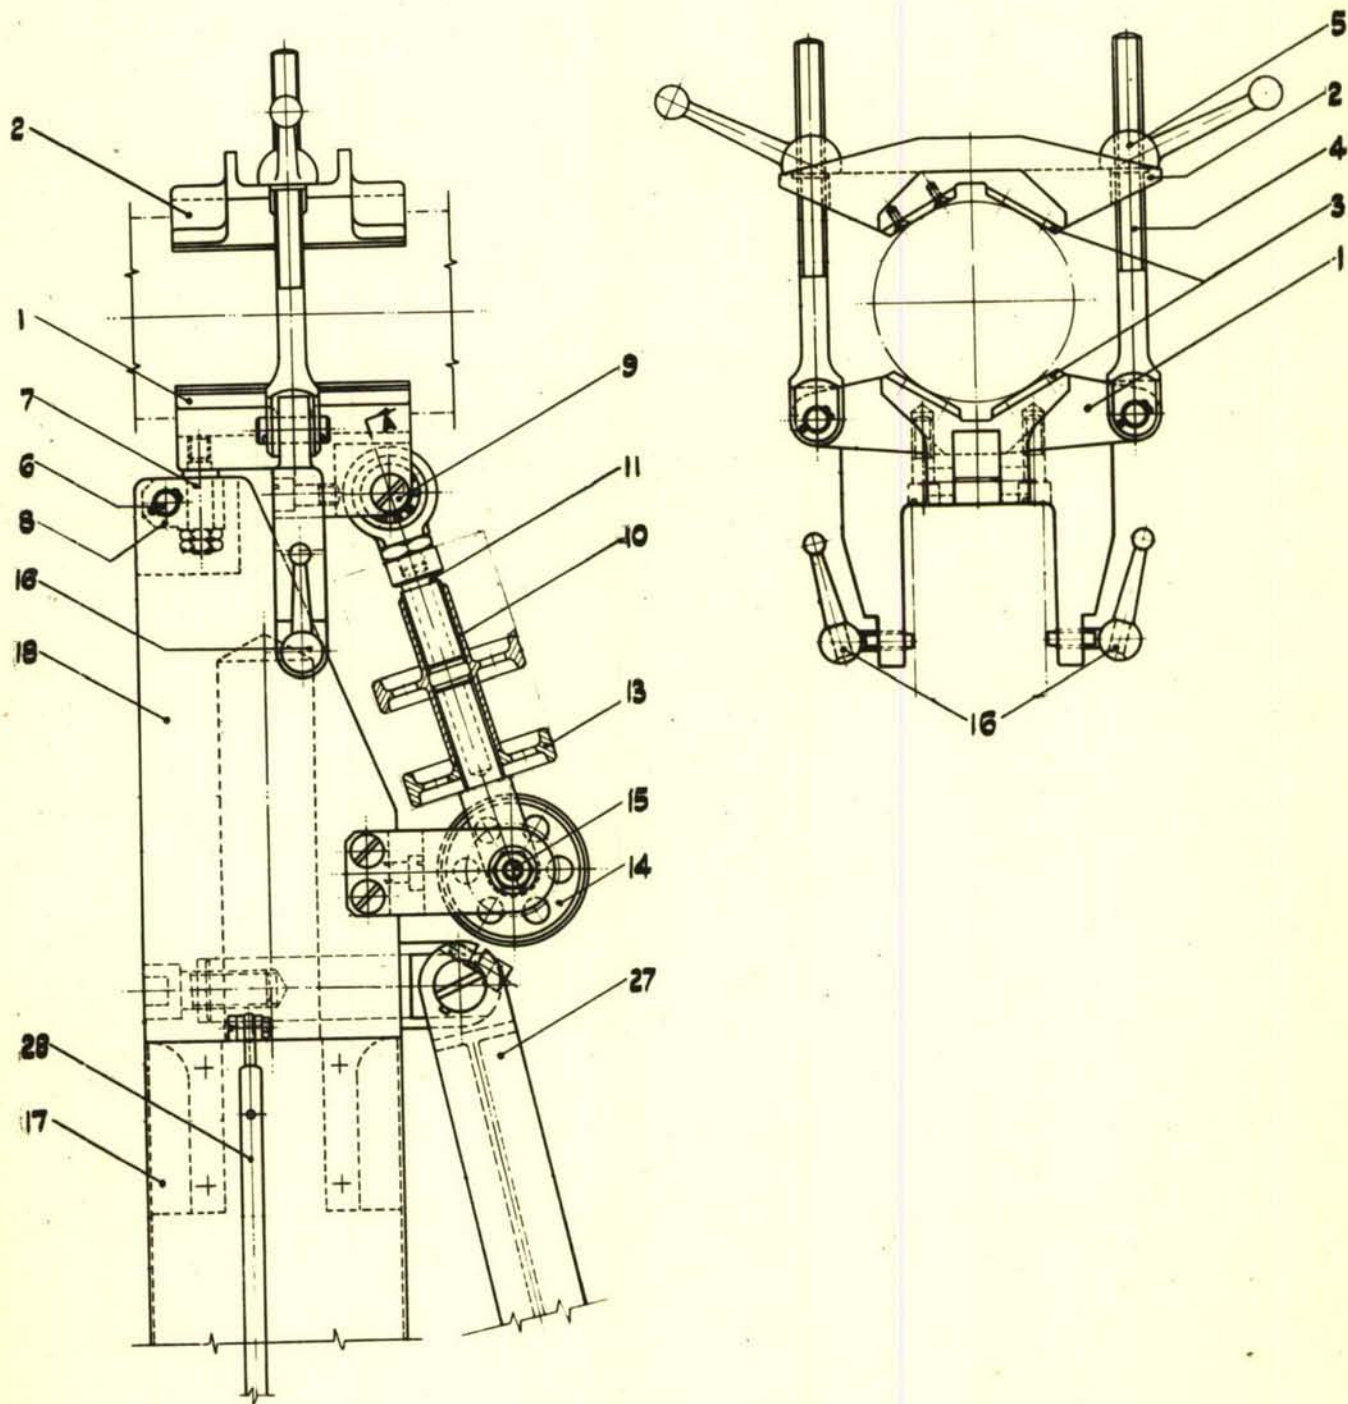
ADJUSTABLE CLAMPING DEVICE AND HEAD OF PENDULUM SUPPORT FOR ROCKET MOTOR STAND.
